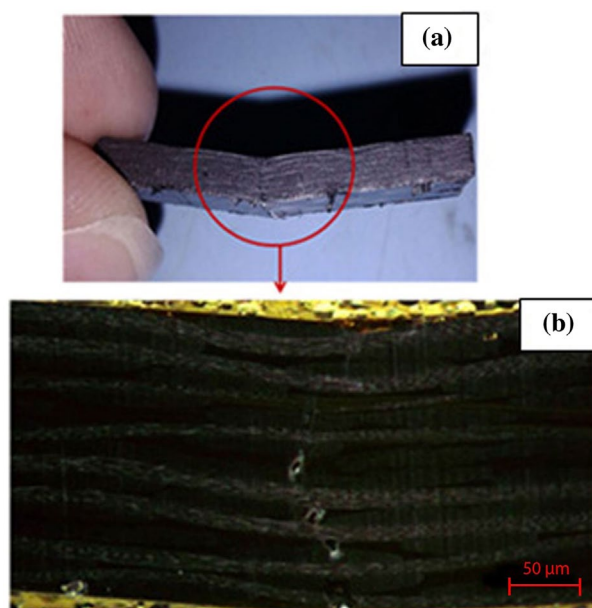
(a) PEI/carbon fibre composite without welding, after the ILSS test; (b) micrograph showing the start of fracture in the region fractured by the ILSS test of the PEI/carbon fibre laminate without welding.
